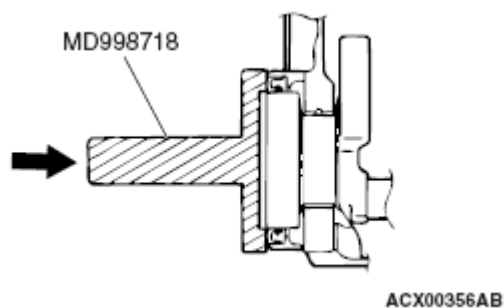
Installing Oil Seal Using Special Tool MD998718
